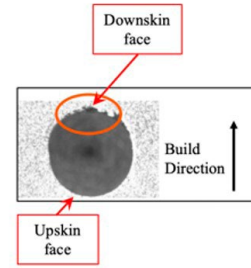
Photograph of a section through a cooling line fabricated by AM, showing a significantly rougher surface on the downskin side.
